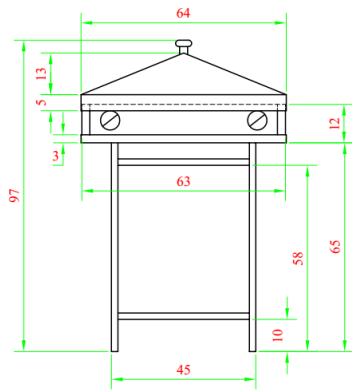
Dimensional drawing of frontal view of electric mitad.
